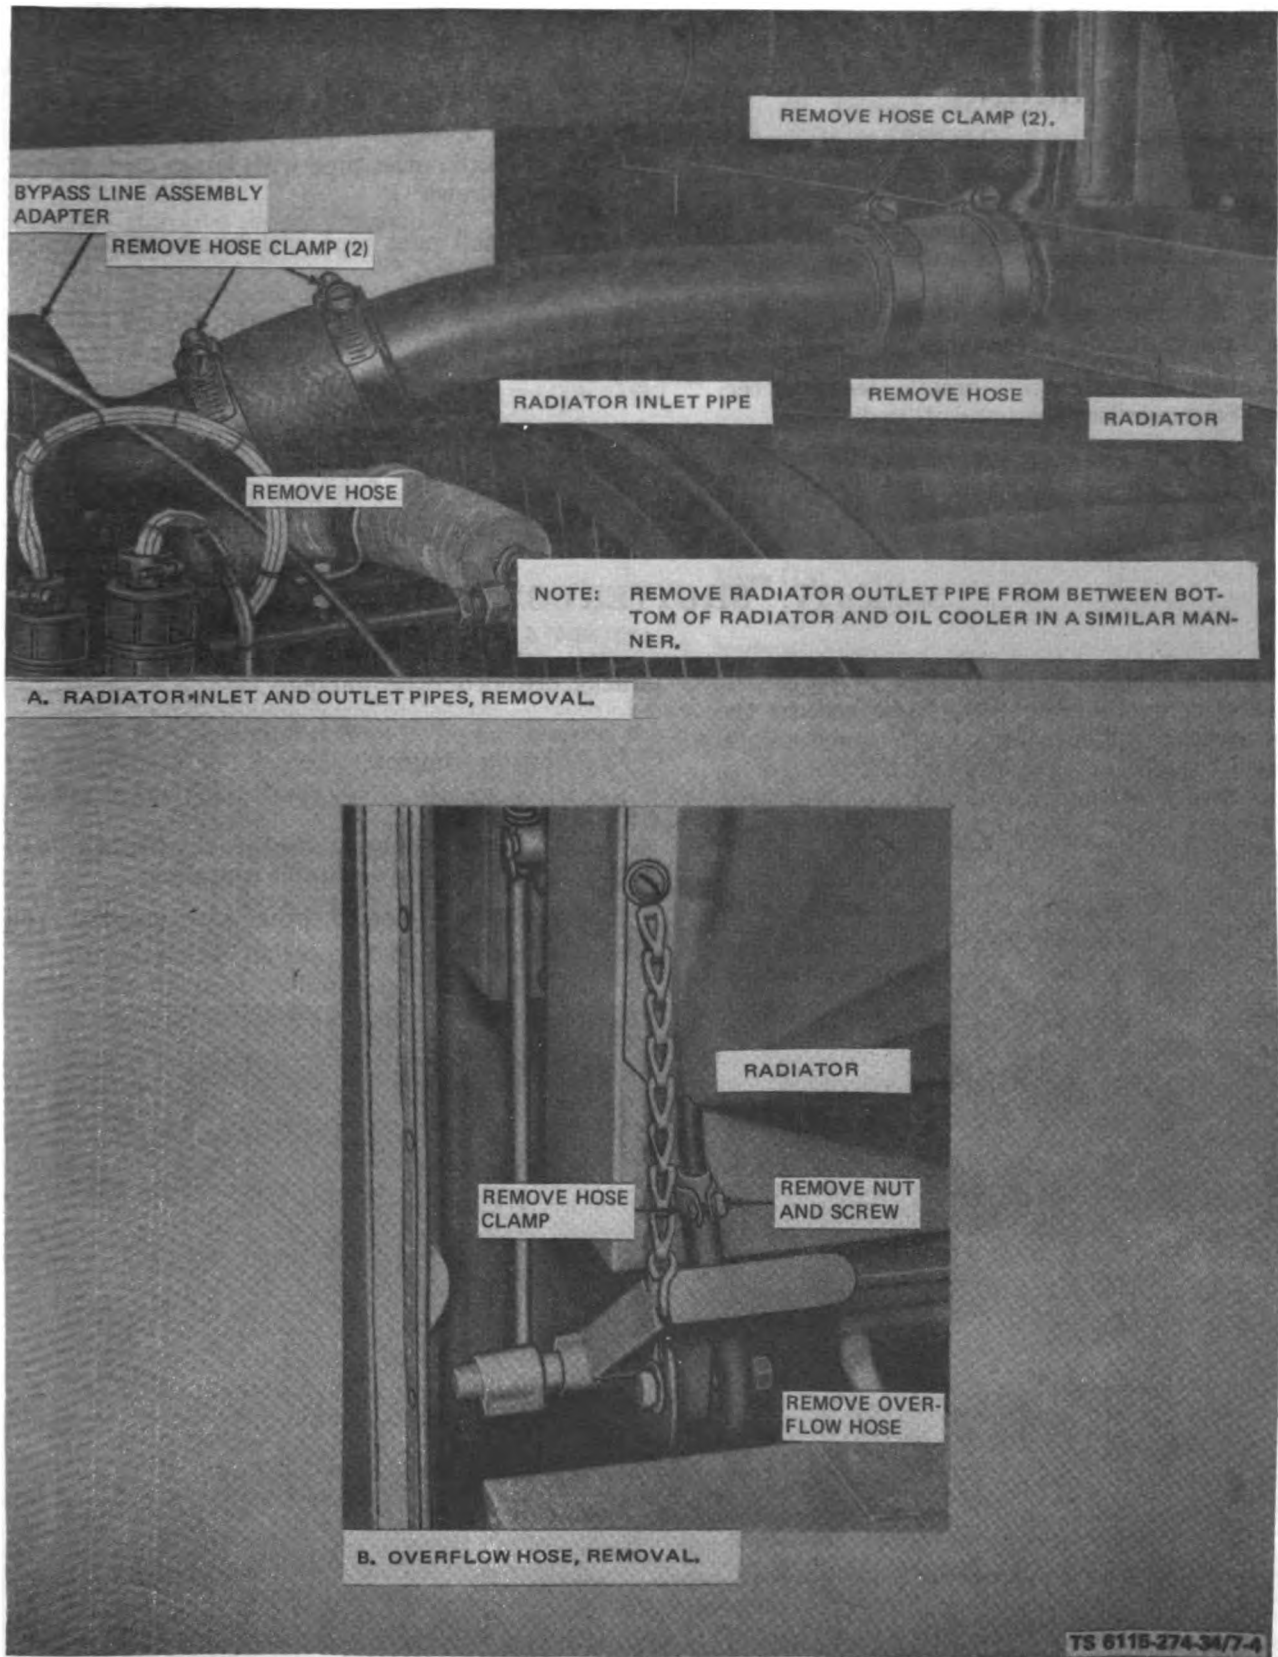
Radiator Inlet and Outlet Pipes and Overflow Hose, Removal and Installation
